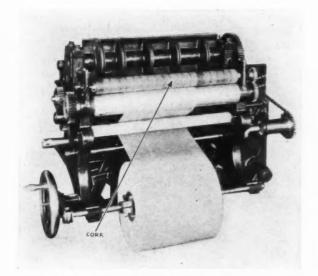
Gum wrapping machine has roll covered with cork for feeding the paper
